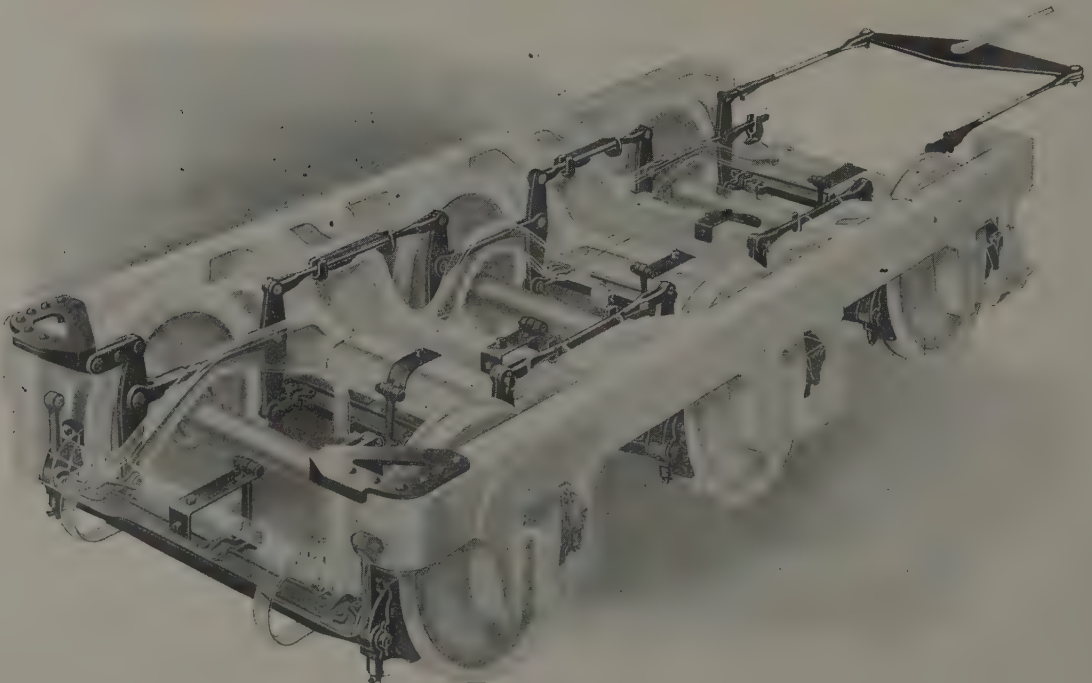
Simplex Clasp Brake. American Steel Foundries.
